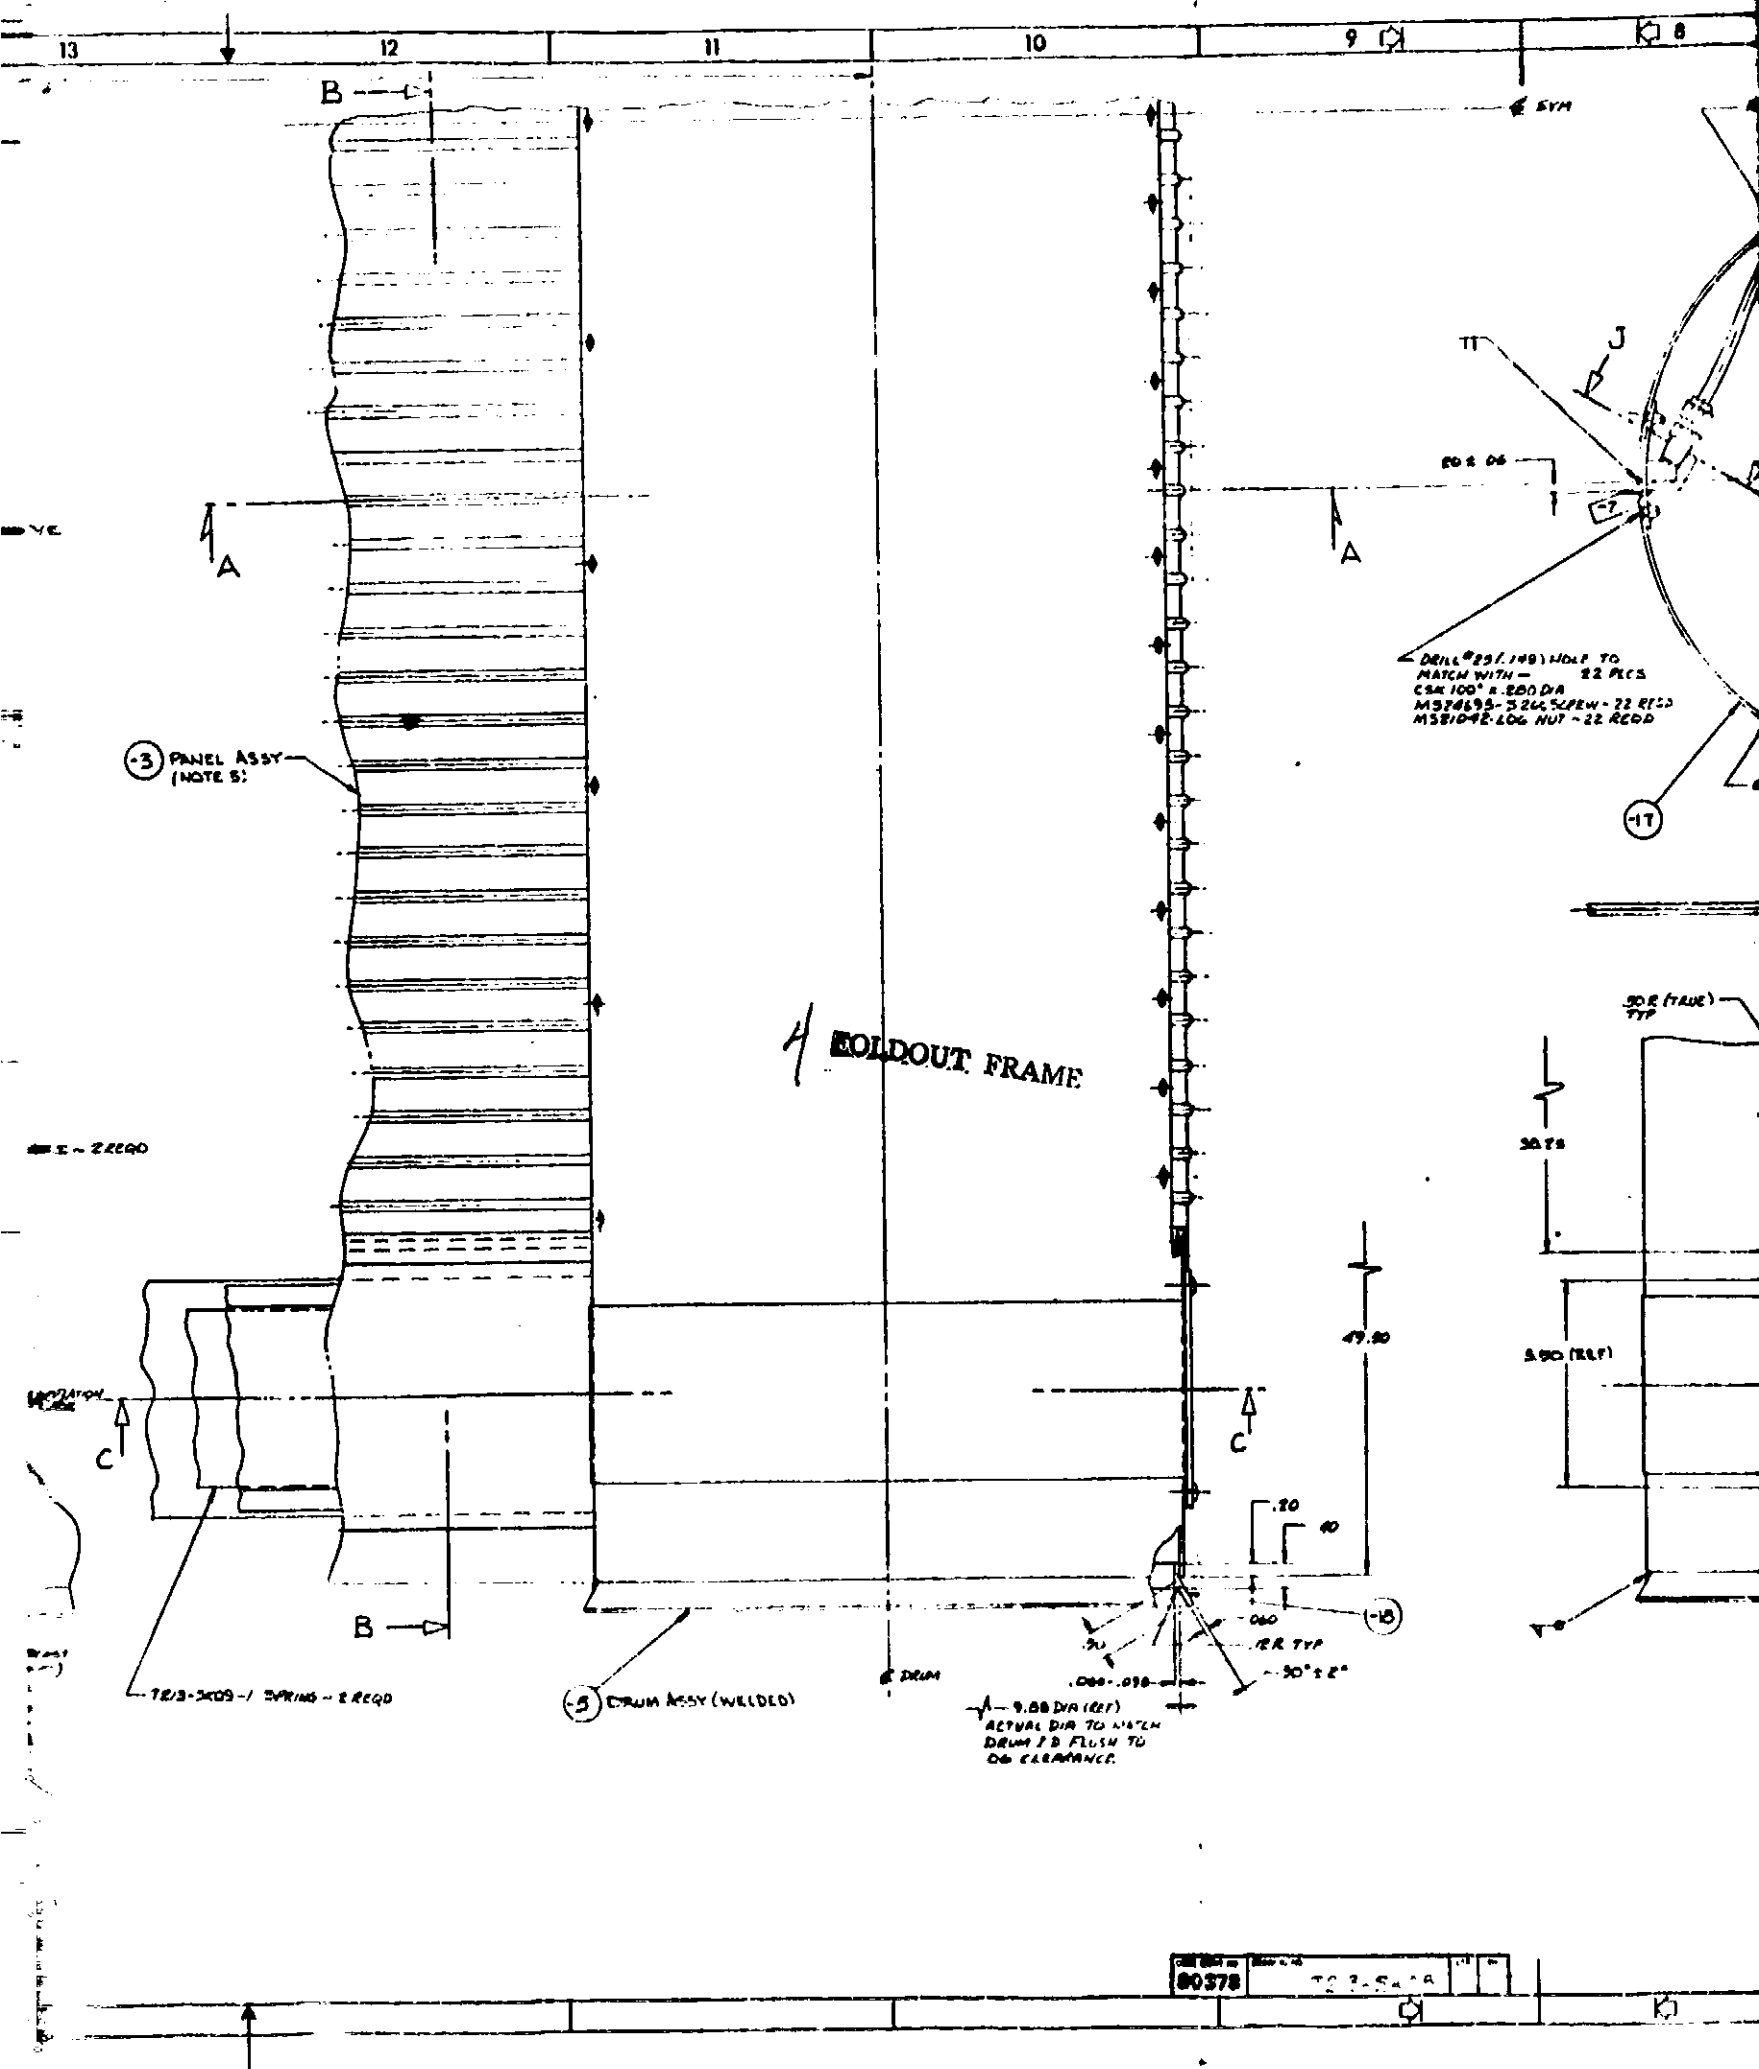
ASSEMBLY FOR FUSION BONDING RADIATOR
